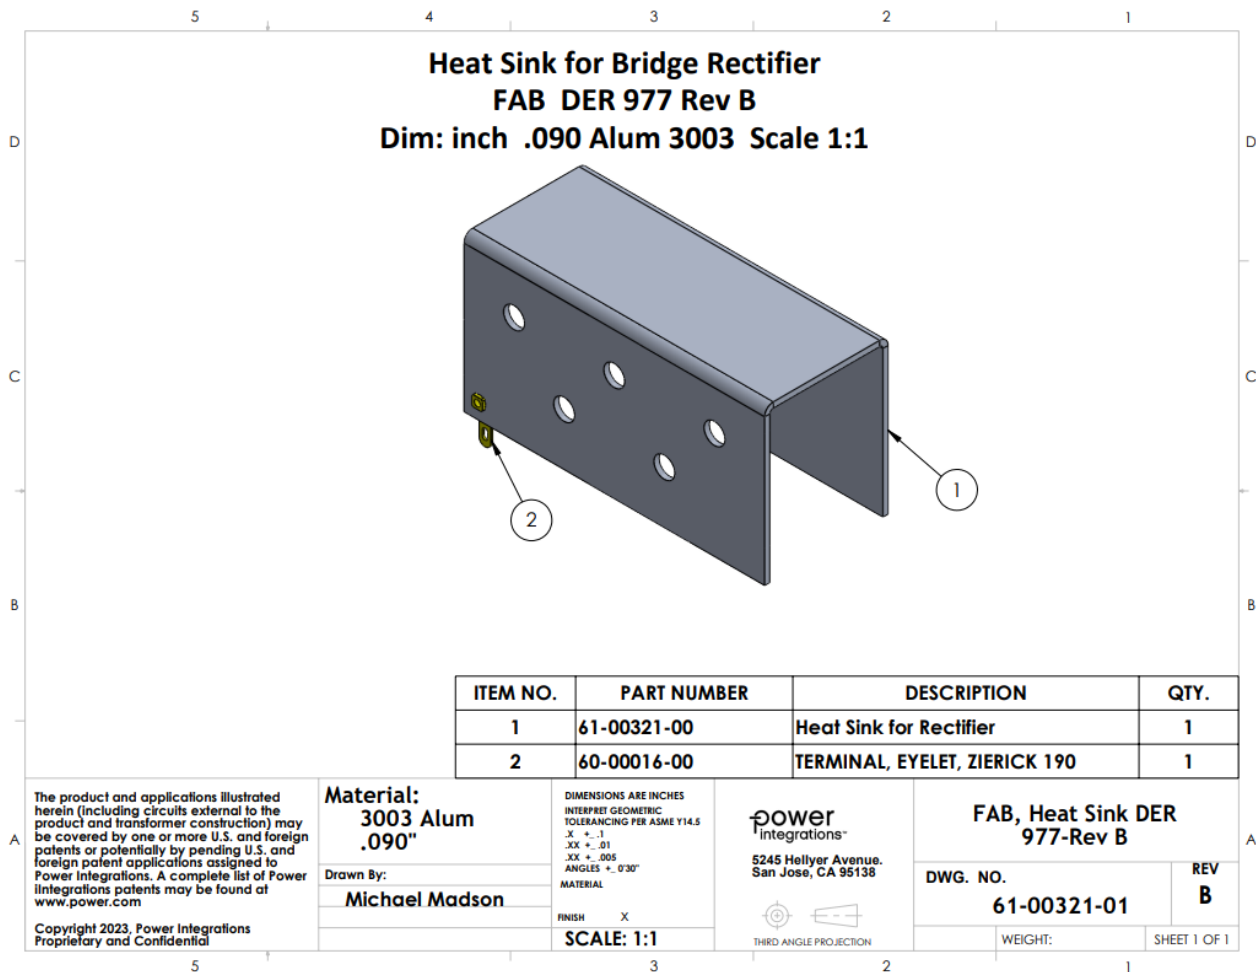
DER977 Bridge Rectifier Heat Sink, Assembly with Fastener
